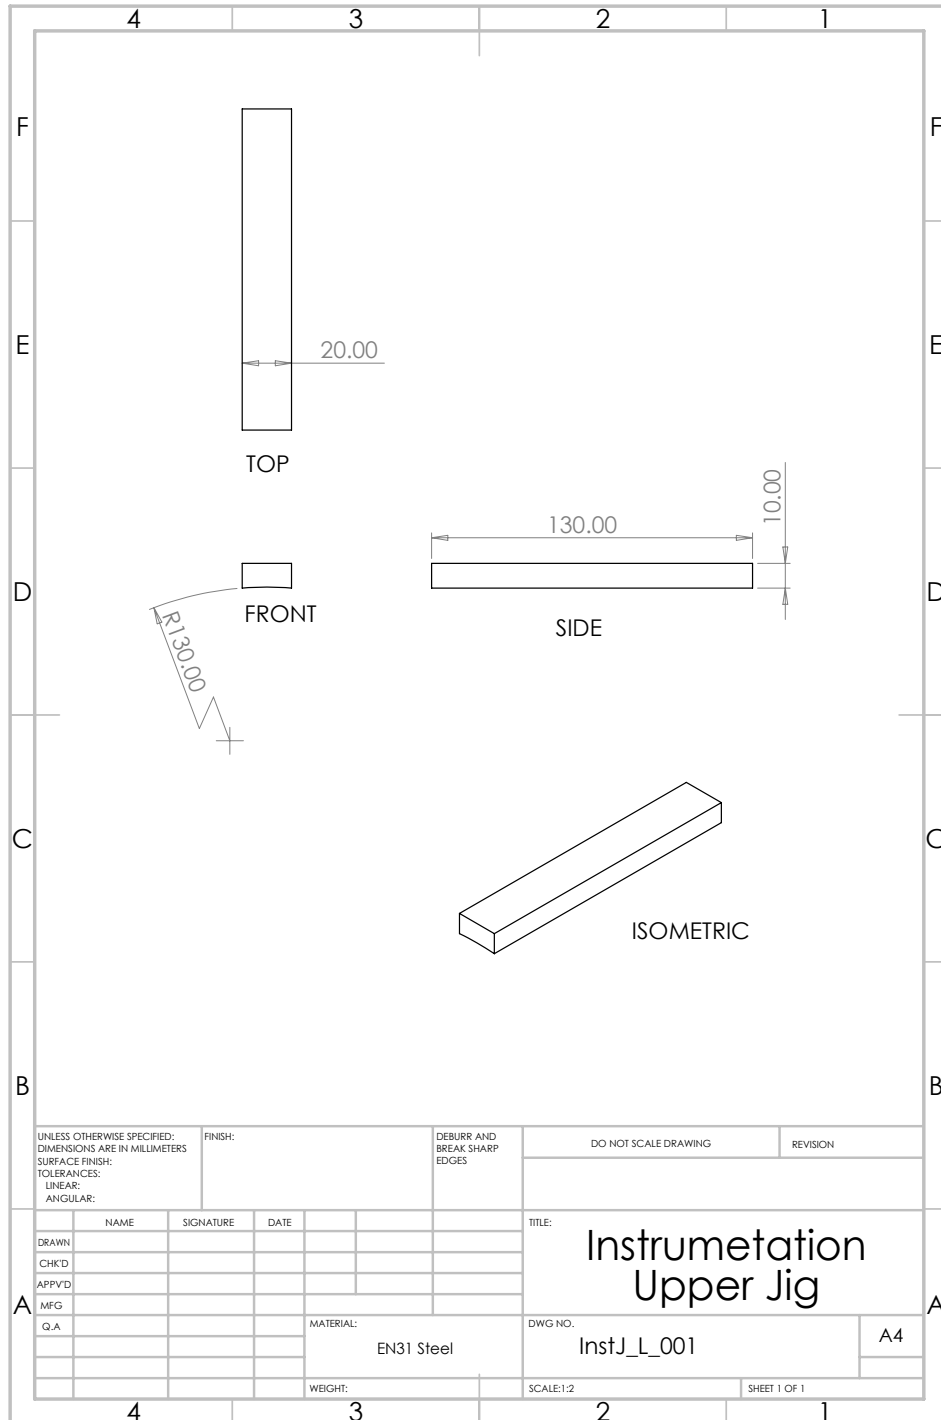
Jig for the outer surface of the MultiLife inner raceway
